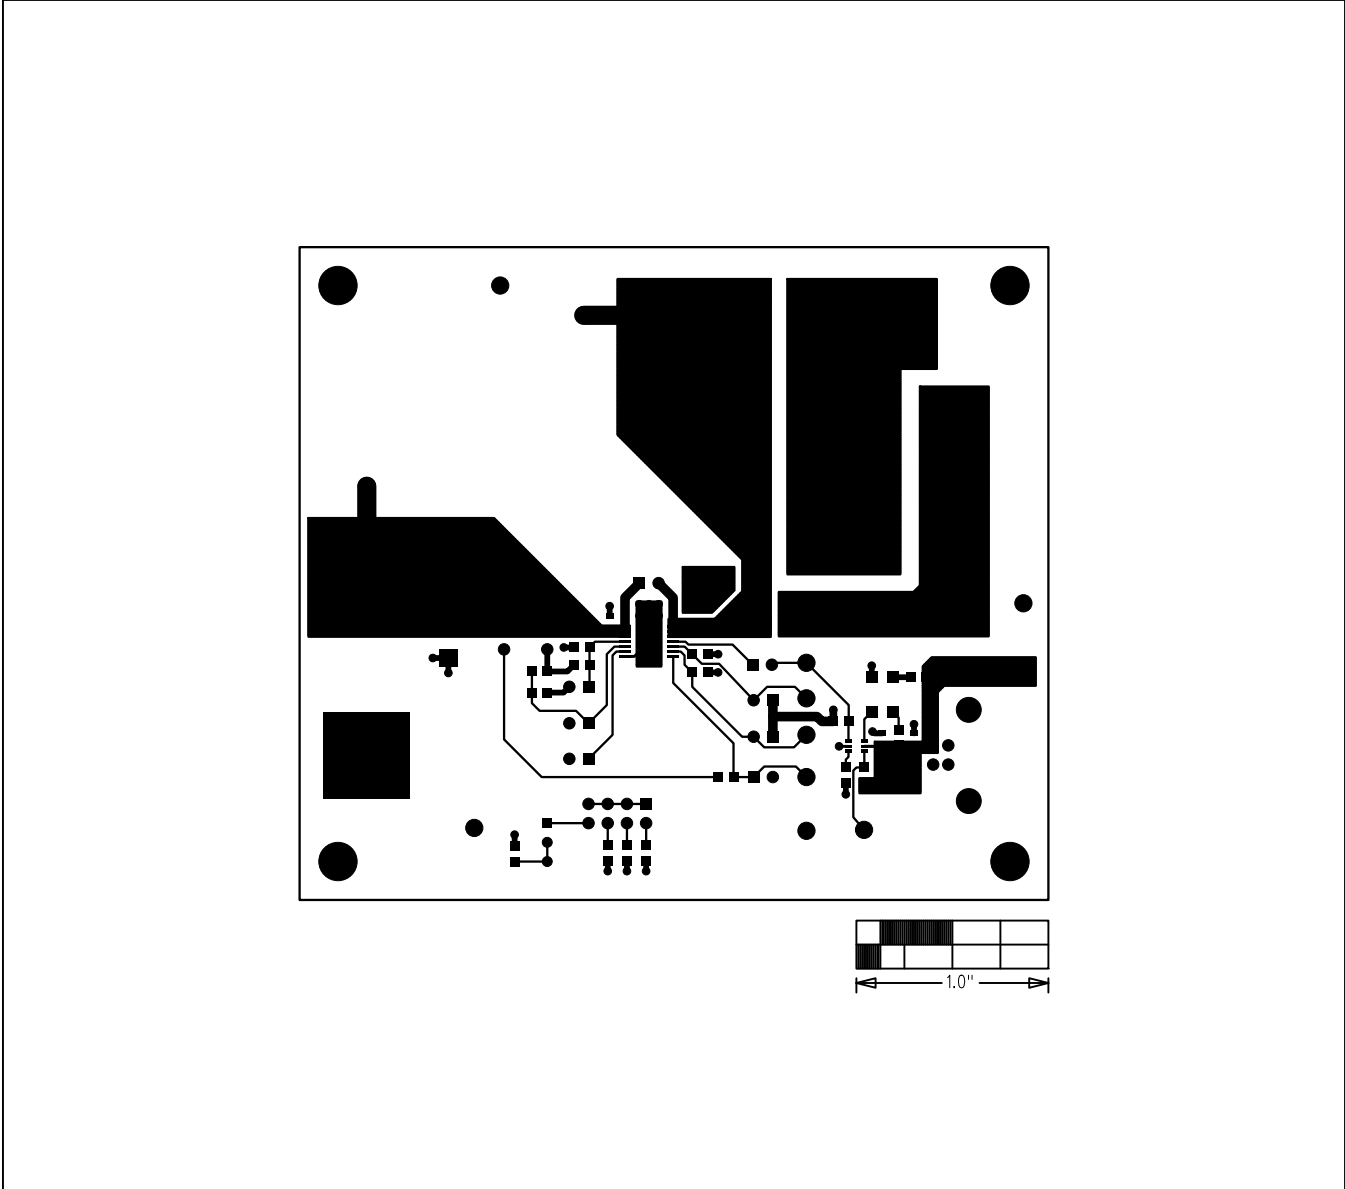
MAX14571 EV Kit PCB Layout—Component Side
